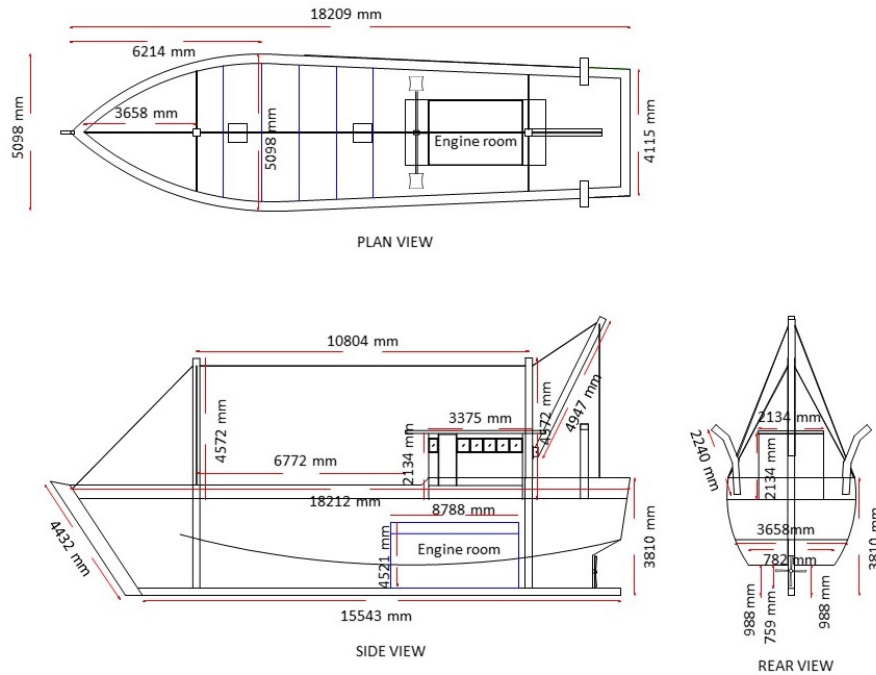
Layout of small motorised and mechanical fishing boats (Source: Boat Manufacturer)
